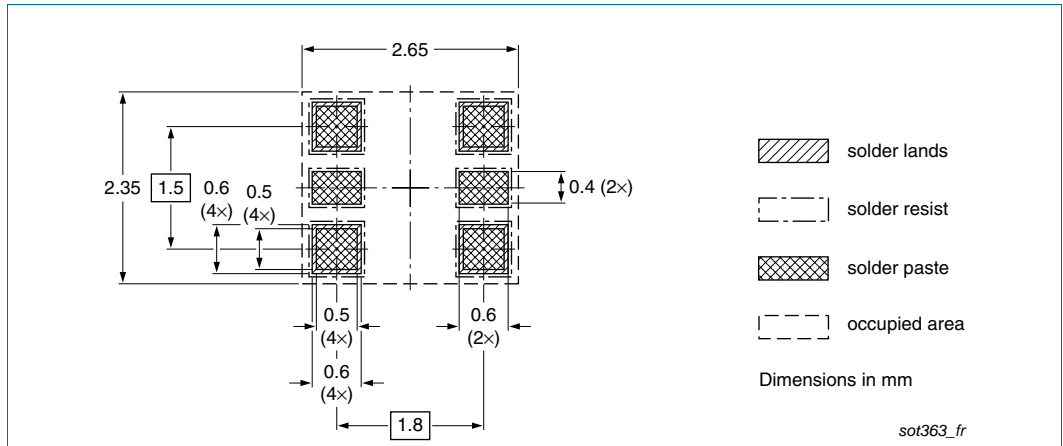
Reflow soldering footprint SOT363 (SC-88)
